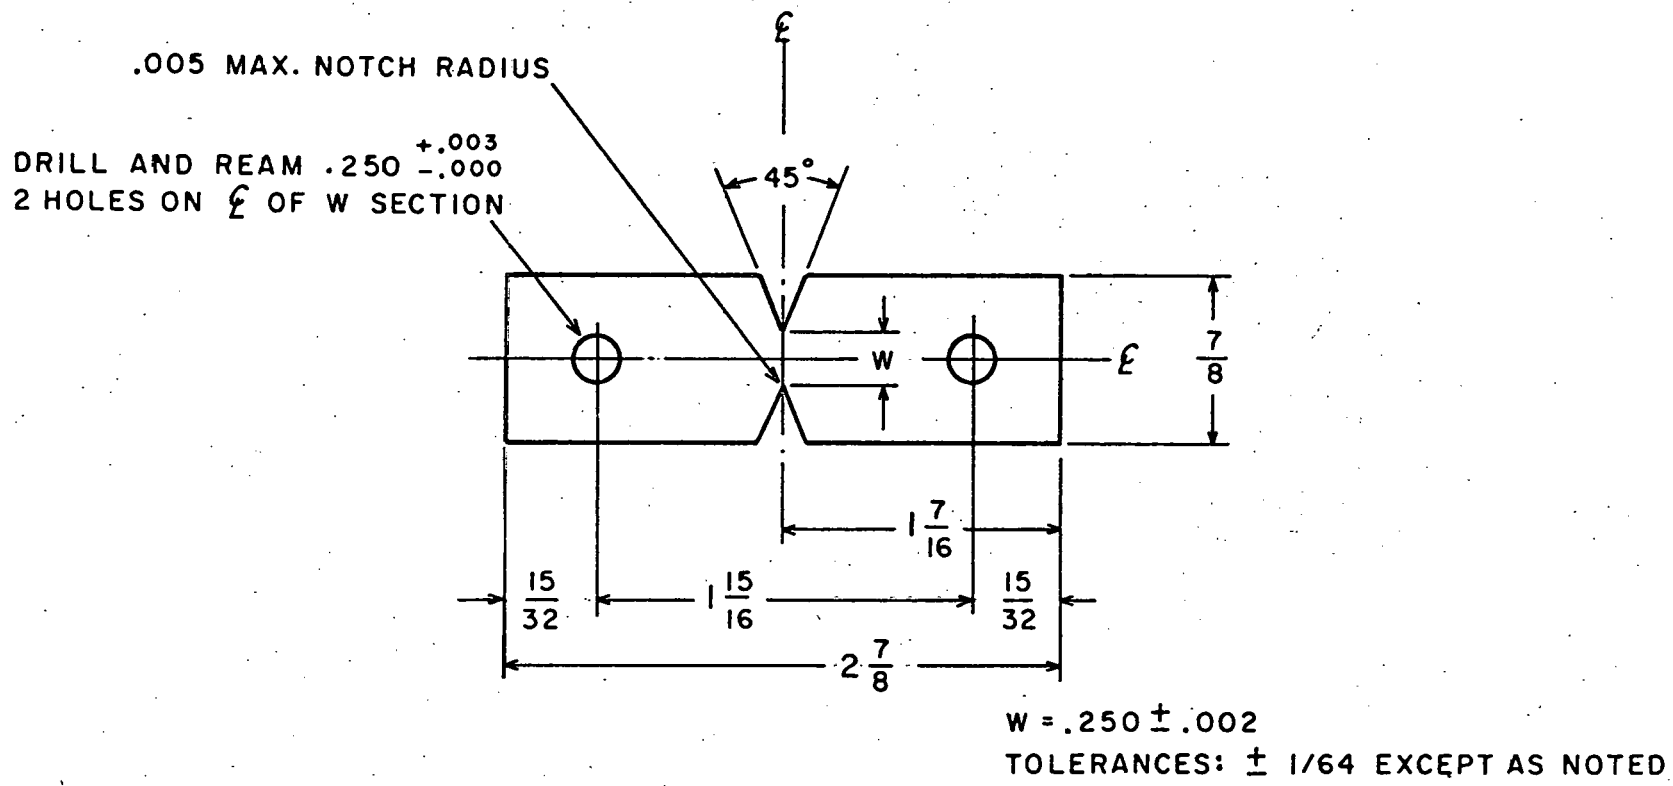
REDUCED SIZE NOTCHED TENSILE AND DELAYED FAILURE SPECIMEN.
